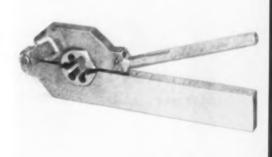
Illustration showing shop-made thread deburring tool in closed position.
